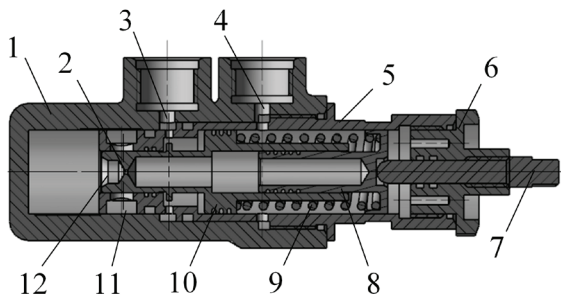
Half sectional view of pressure differential valve; 1 valve enclosure, 2 damping orifice, 3 oil supply pressure inlet, 4 medium cavity pressure inlet, 5 valve body, 6 screw plug, 7 adjusting screw, 8 guide rod, 9 spring, 10 valve spool, 11 overflow orifice, 12 valve inlet
